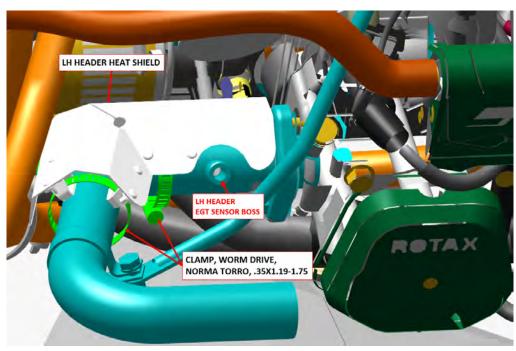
HEADER HEAT SHIELD INSTALLATION
